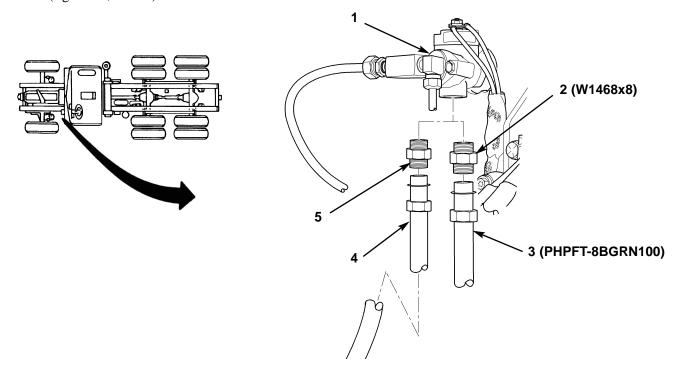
Replacing Tube Between Double Check and Protection Valves.
